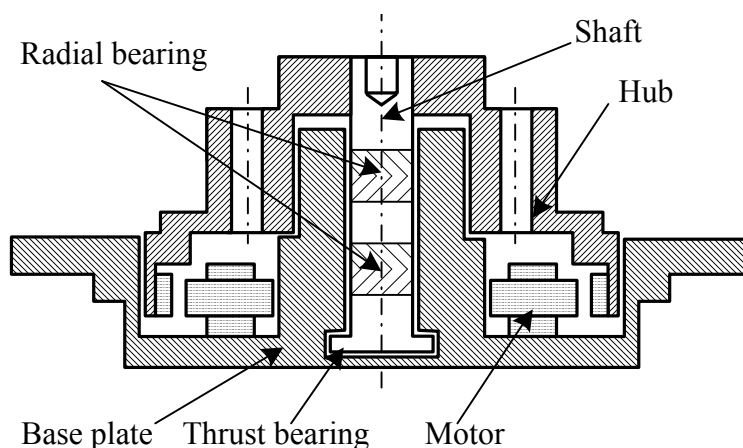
THE CROSS-SECTIONAL VIEW OF A TYPICAL FDB WITH ROTATING-SHAFT SPINDLE
